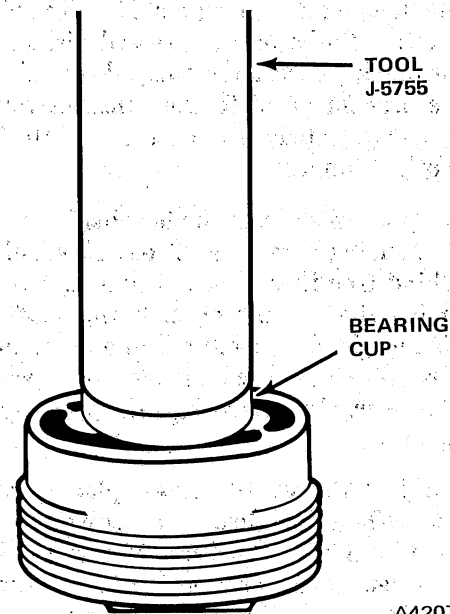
K-10 Installing Wormshaft Lower Bearing Cup
